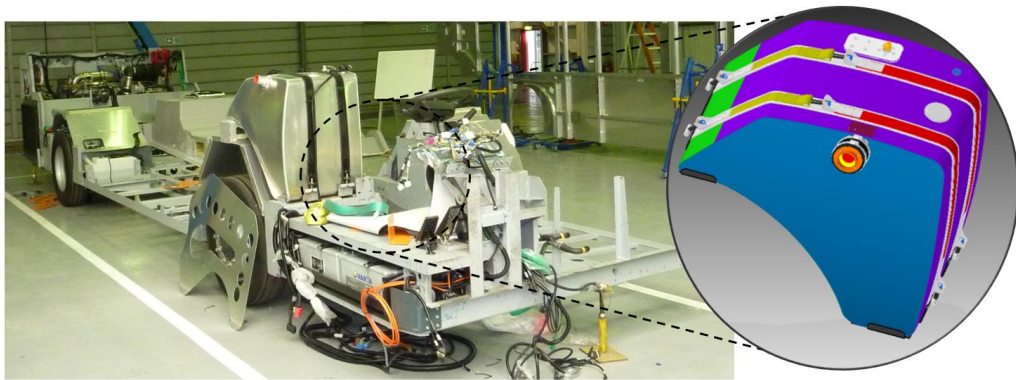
Typical fuel tank installed on ADL DD buses – 250 litres welded steel tank – 90 kg.
